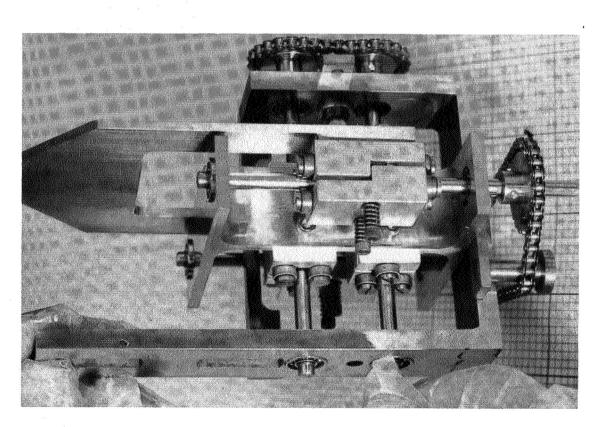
Friction Probe Holder as Modified for Multitrack Testing.
